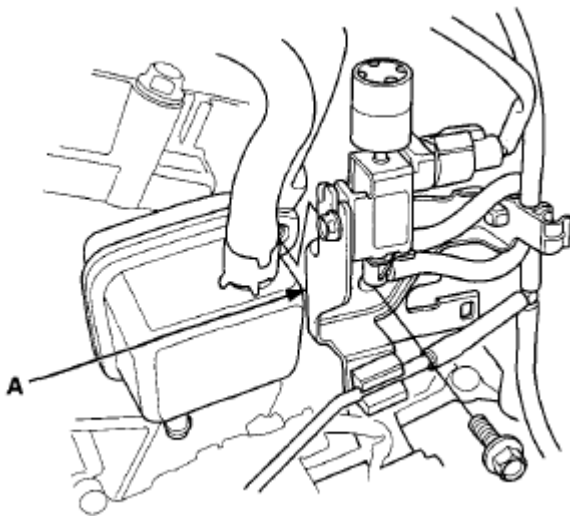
Identifying Engine Mount Control Solenoid Valve Bracket
